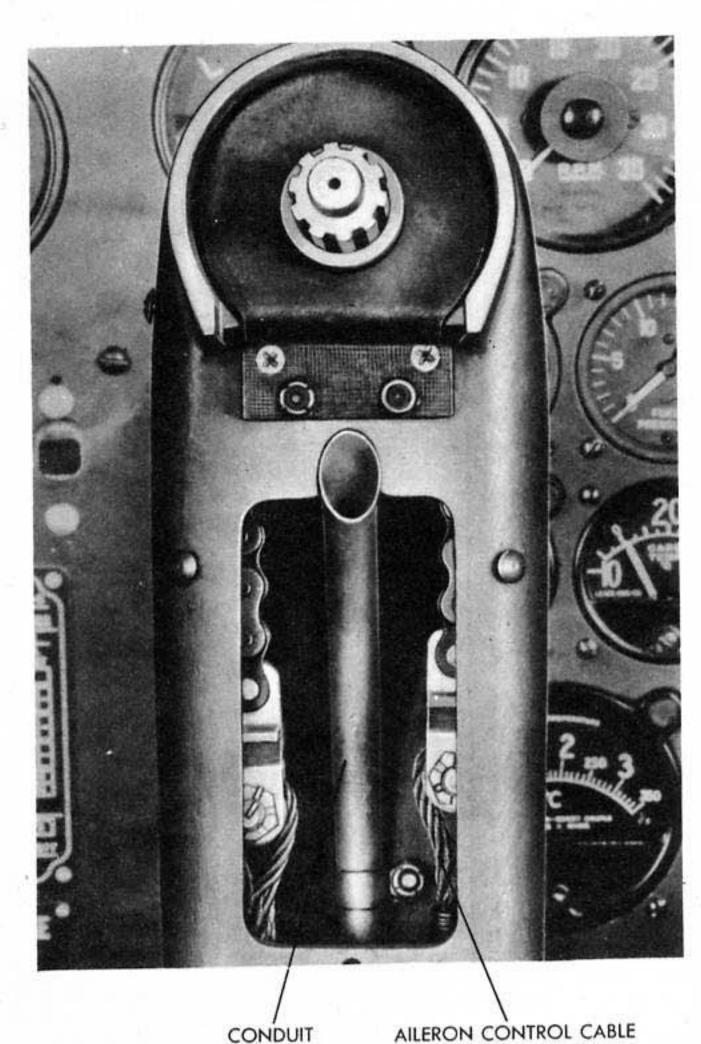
CONTROL COLUMN - TOP COVER PLATE AND WHEEL REMOVED
